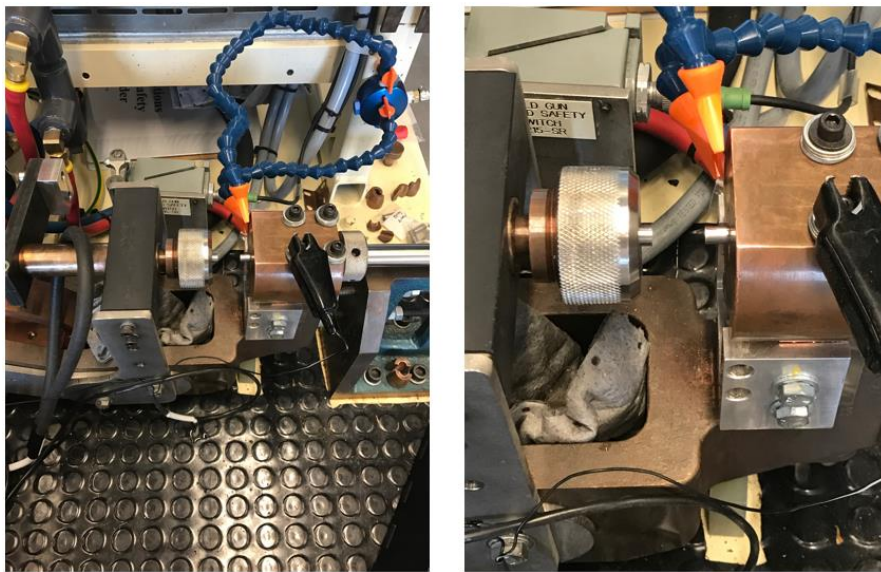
Weldments placed within electrodes prior to rod joining.
